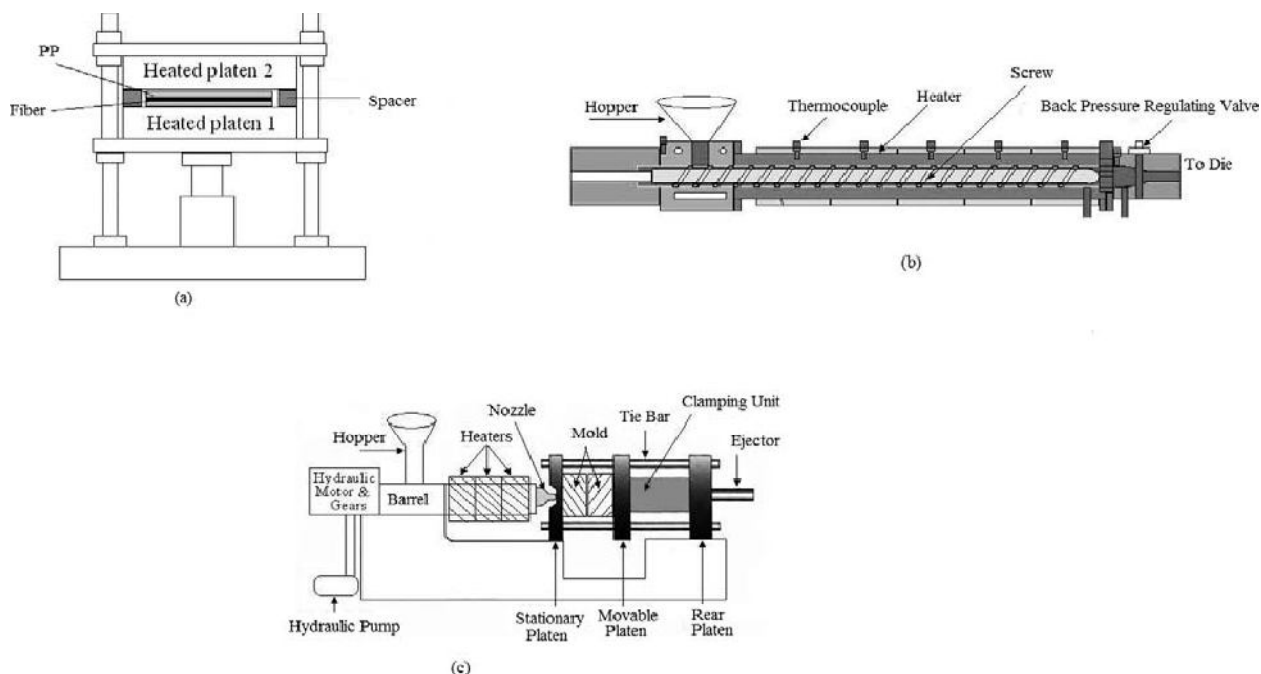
(a) Compression, (b) extrusion and (c) injection molding machines
